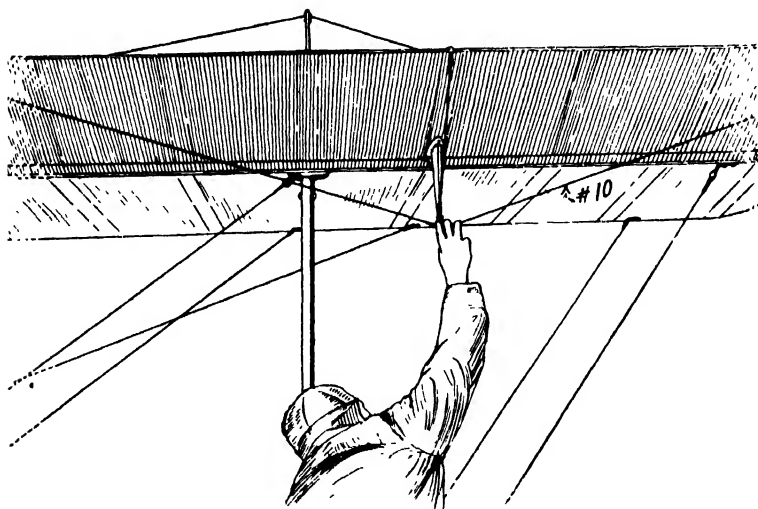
Inspecting Lower Control Horn on Aileron.
